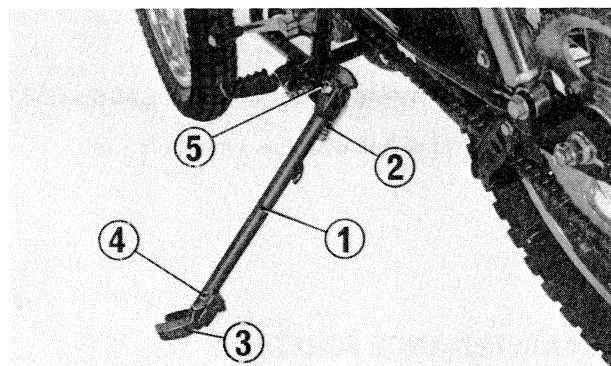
(1) Side stand bar (4) 6 mm bolt
